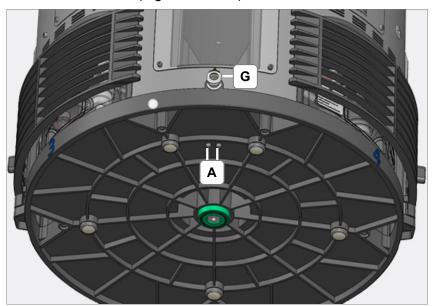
Bottom view of cleaning machine with screw connection
